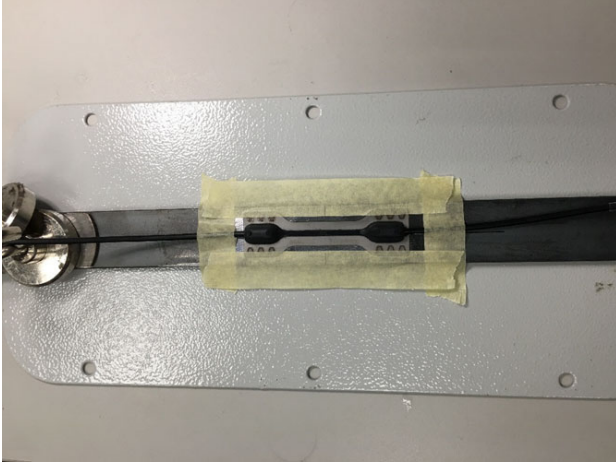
Ensuring a smooth welding process by thoroughly fixing the sensor
